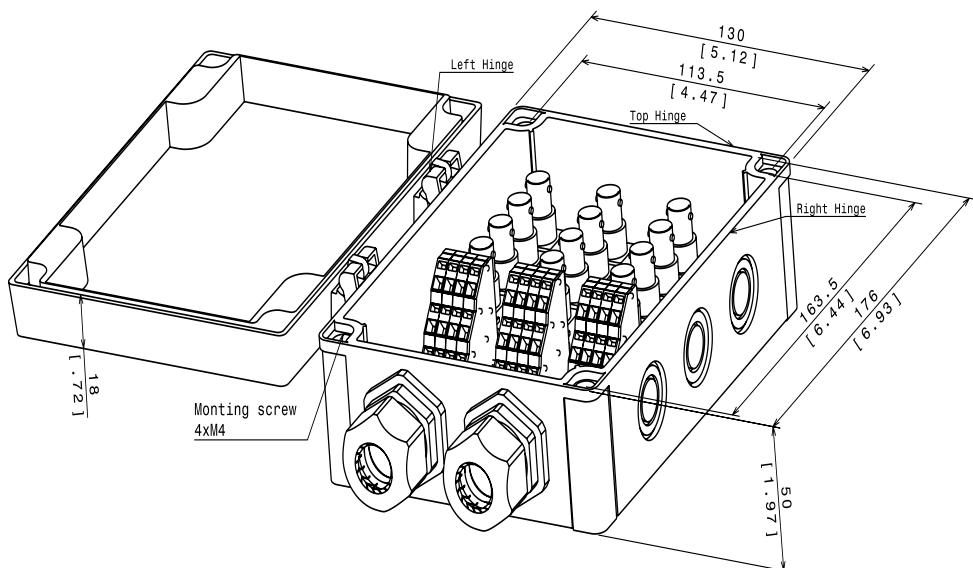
Outline drawing, model 749.01-12-02(LH)-1
